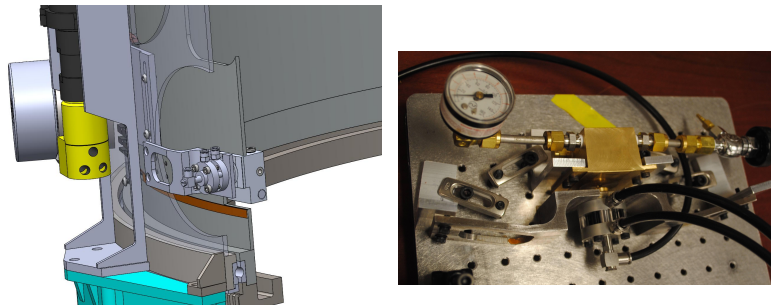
Figure showing the fixture supplying compressed air to the upper assembly (top) and a photo of the prototype of the fixture (bottom).
